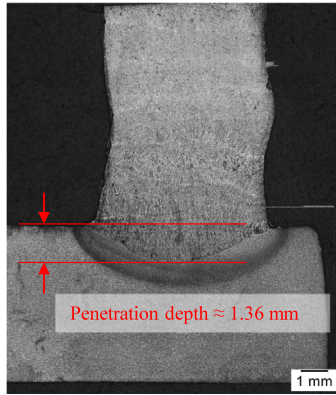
Micrograph showing weld penetration depth in Specimen S-24a.
